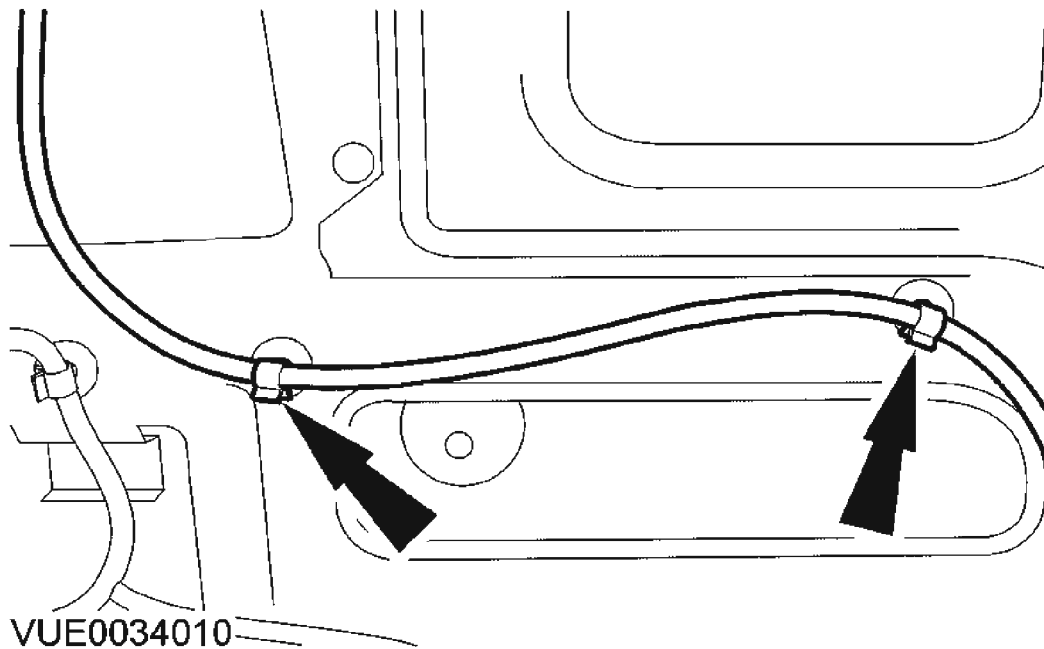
Detaching Liftgate Latch Cable From Retaining Clips
